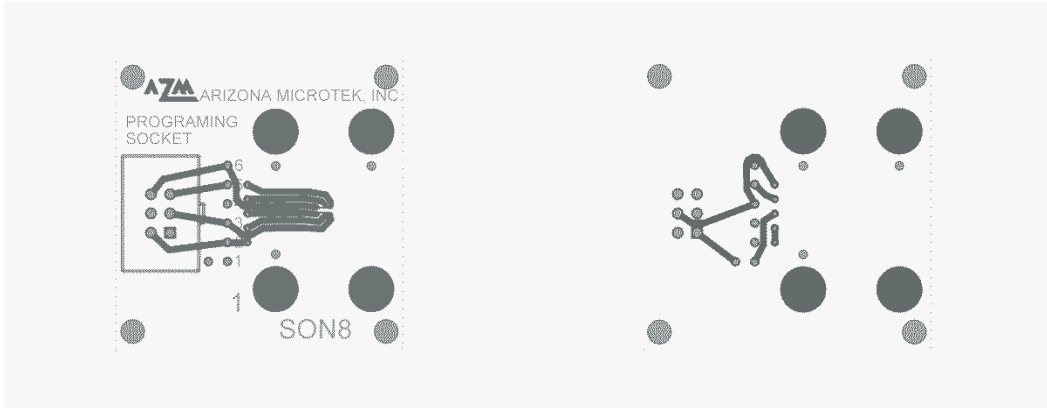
Q-SON8 Programming Socket Adapter Board (Top & Bottom View)
